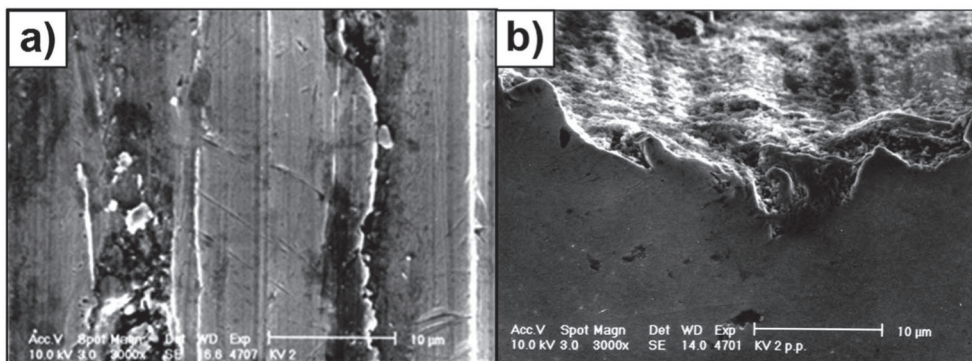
Stereometric image (a) and structure of the surface layer (b) ball rolling burnishing surface $F = 5 \text{ kN}$, $R_k = 9.25 \text{ mm}$ after wearing on a distance of 9,500 m
